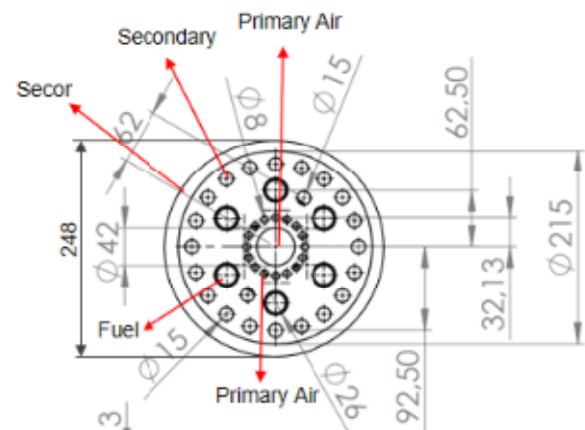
Geometry of the inlet head of the non-premixed combustion burner
